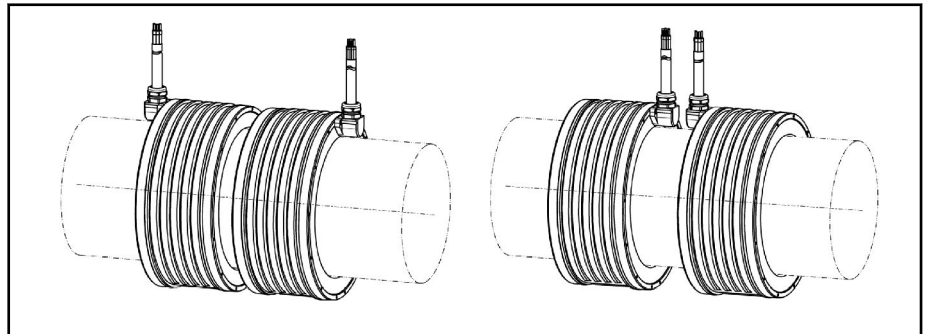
Parallel motor arrangement (cable outlet in opposite directions)
